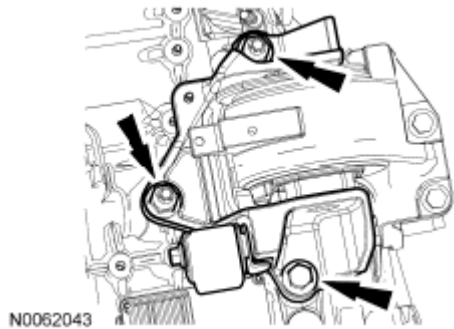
Locating Transaxle Support Insulator Bracket Bolt & Nuts
